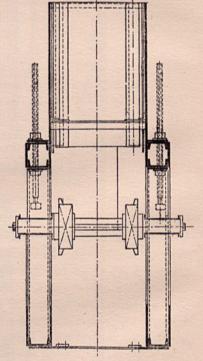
FEED ELEVATOR. DETAIL TENSION END.
